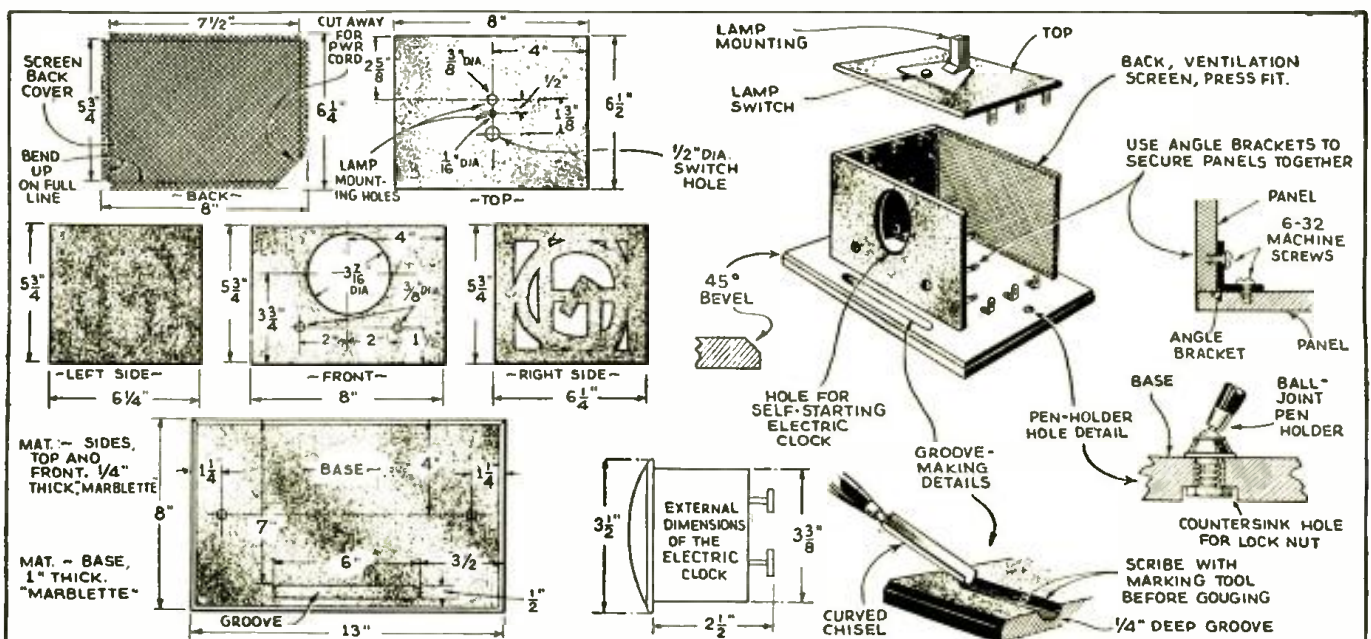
Details for cutting, drilling and fabricating the cabinet. Note the use of angles for fastening the panels together.
